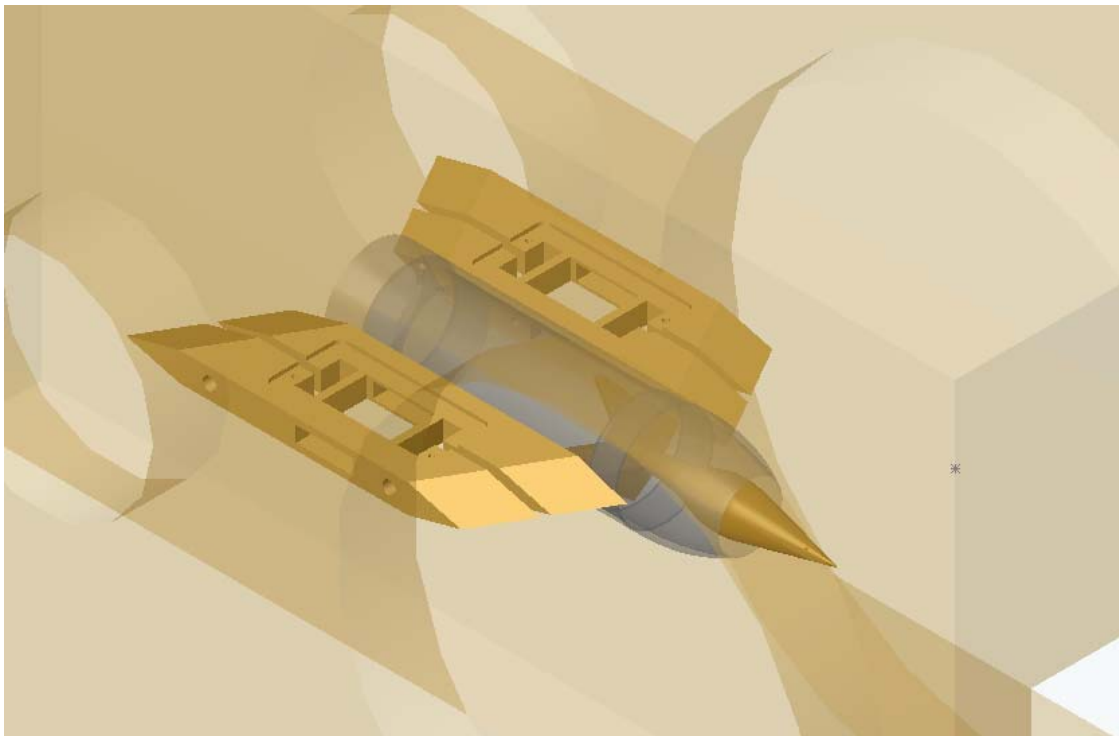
Detailed view of ramjet in wind tunnel with support struts.
